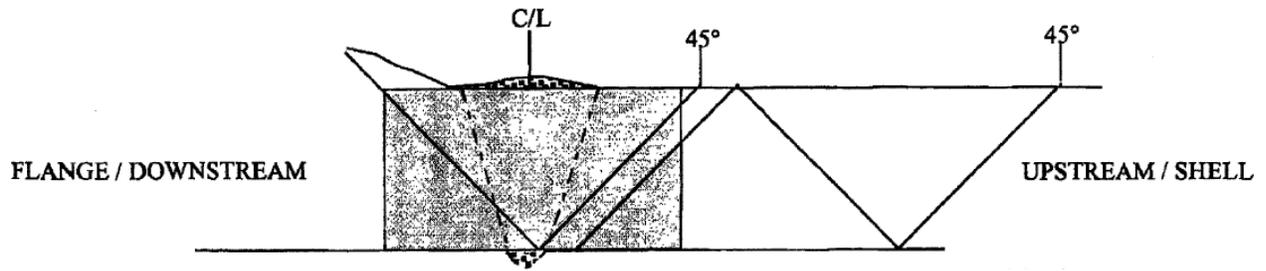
for RHR Heat Exchanger Shell Welds
